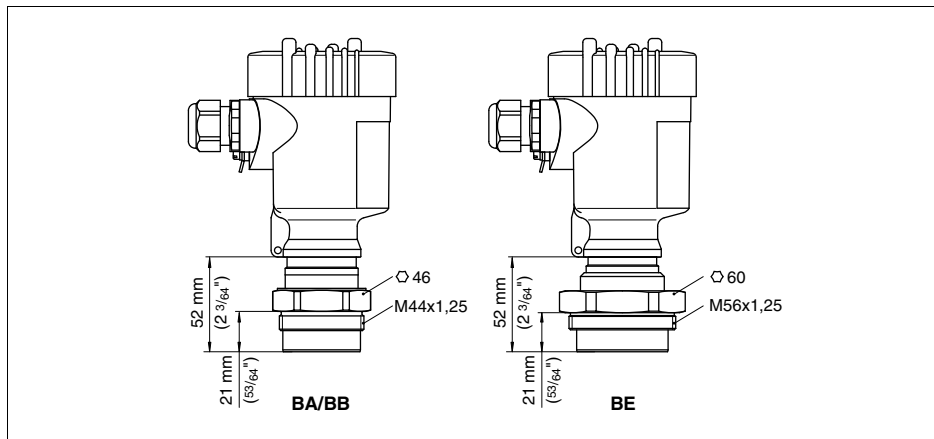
VEGABAR 64 - threaded fitting for the paper industry: BA/BB = M44 x 1,25, BE = M56 x 1,25
